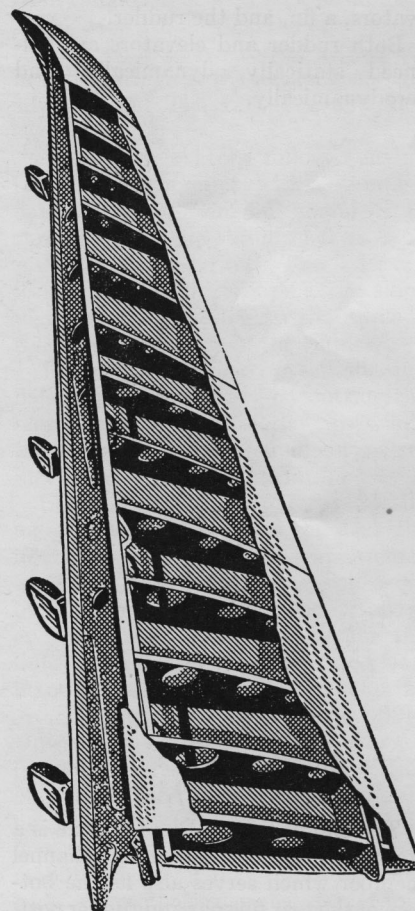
The Grumman F6F Hellcat stabilizer unit is built of stamped ribs riveted to a single-shear webbed beam and attaches to the fuselage at two points. The juncture with the fuselage is sealed with rubber edging. The tip is quickly removable.
